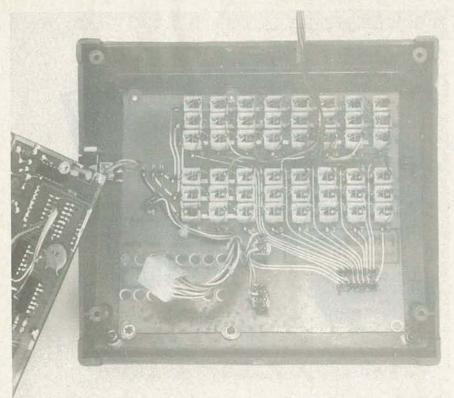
FOIL SIDE OF COMPLETED PANEL BOARD shows connections to jacks and board, and illustrates routing of wires and cables.
